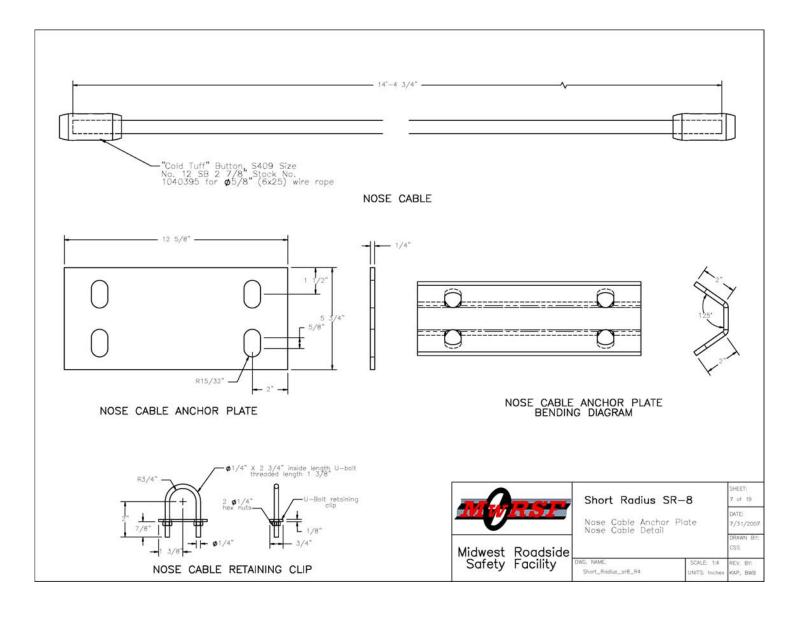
Nose Cable Anchor Plate and Nose Cable Detail (English)
